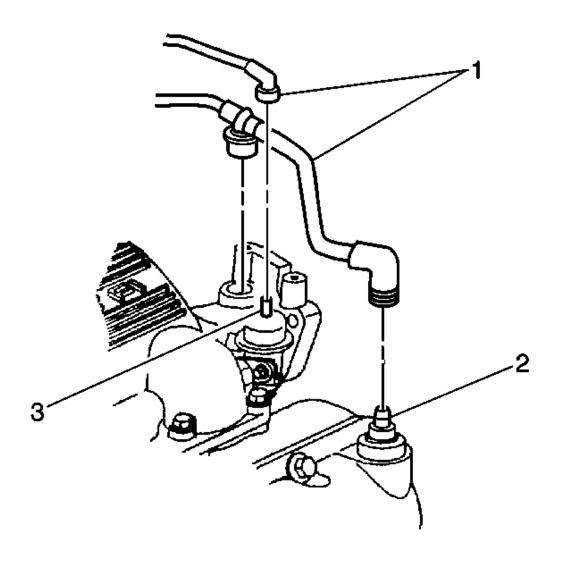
PVC Valve, Vacuum Hoses & Fuel Pressure Regulator Courtesy of GENERAL MOTORS CORP.
